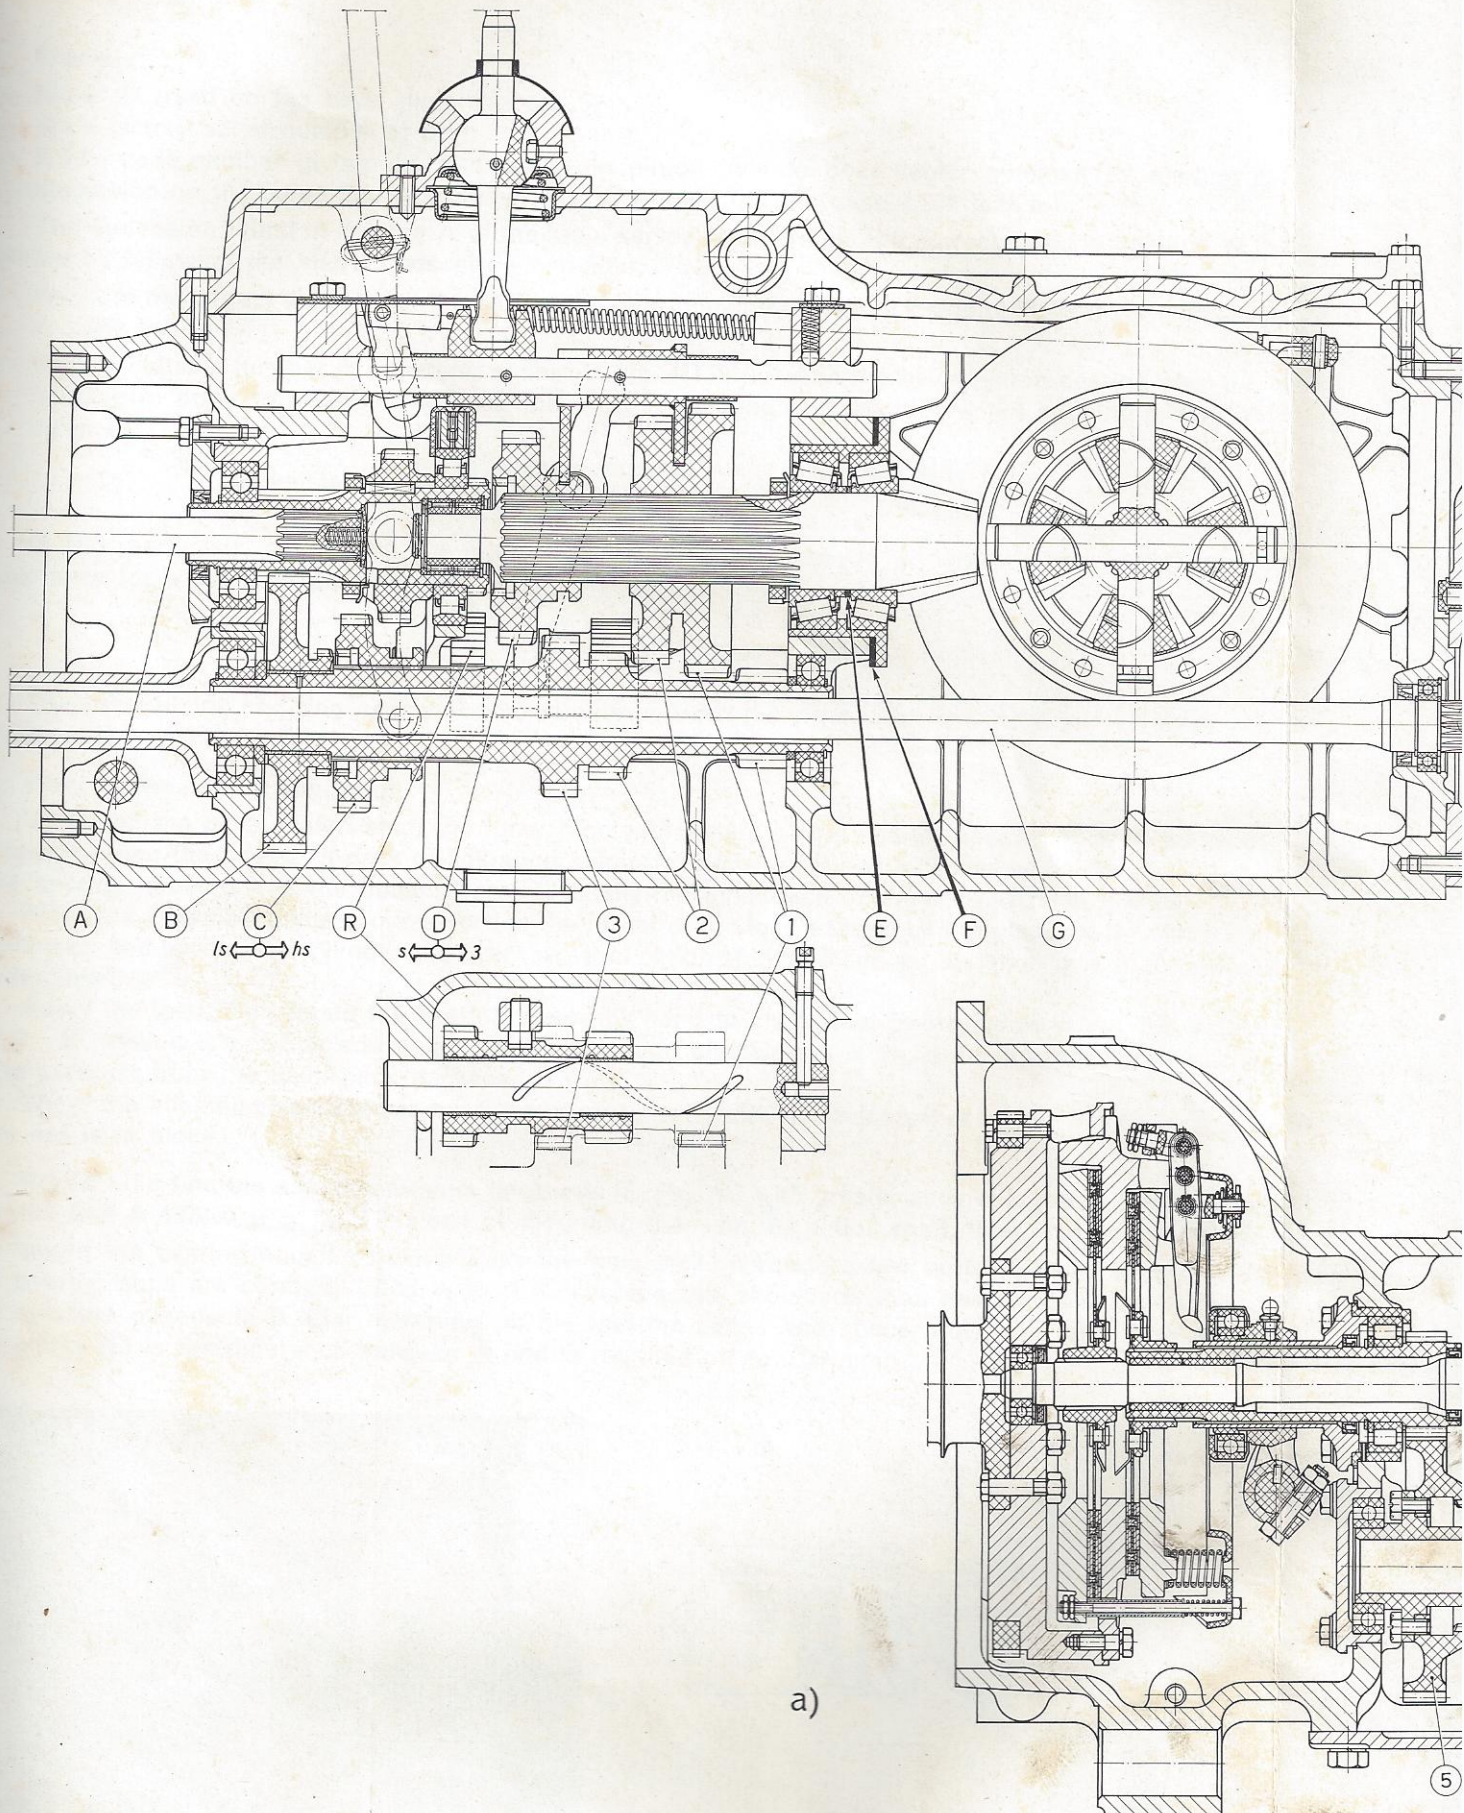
Longitudinal section of gearbox, bevel pinion and P.T.-O. unit.
